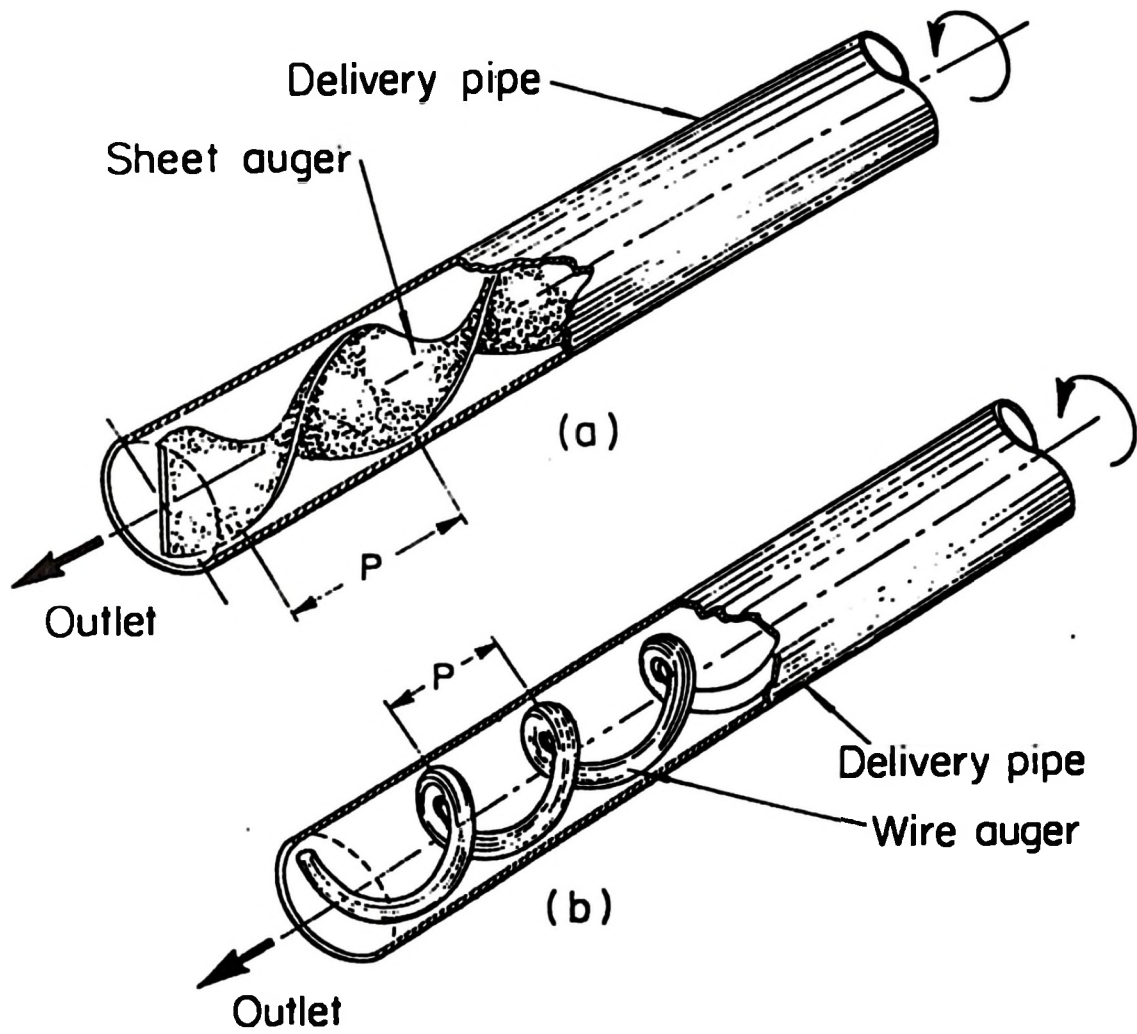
Sheet (a) and wire (b) augers used in experimental hopper.
